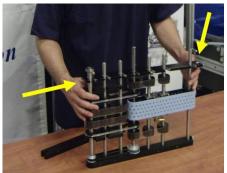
Use Carriage Jig to hold all shafts in place and slide carriage holder back in place.
